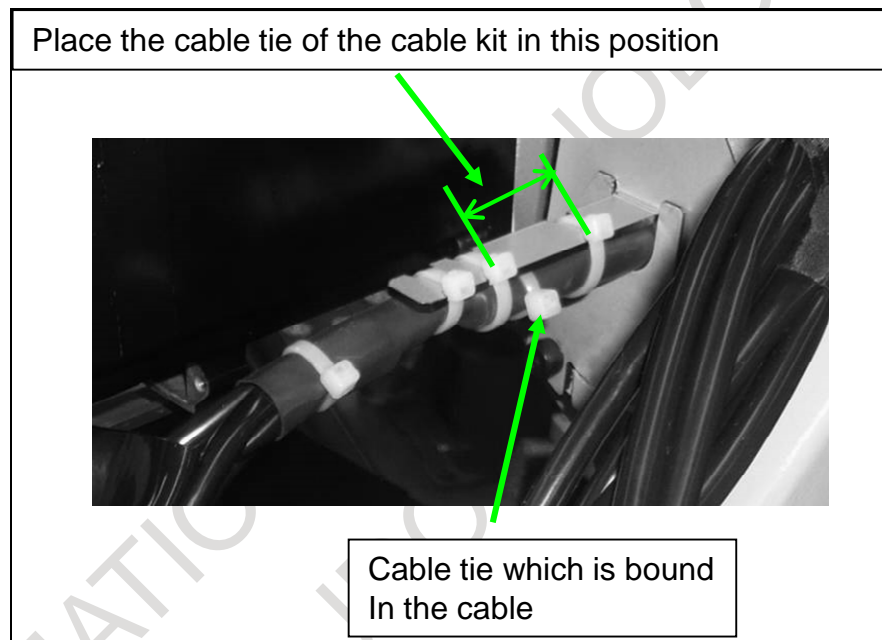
(l) Replacing the cable kit (J3 casing back side)
